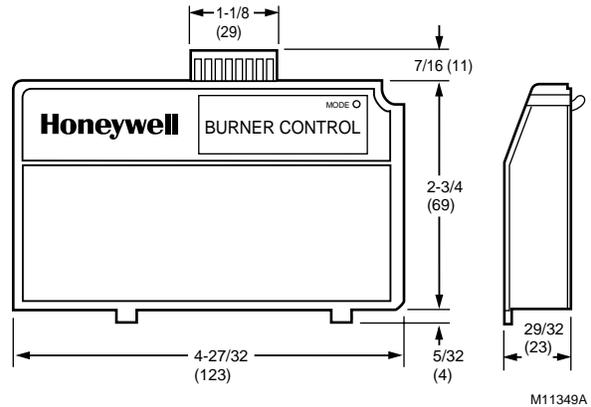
Mounting dimensions of S7810B Multi-Drop Switch Module in in. (mm).
